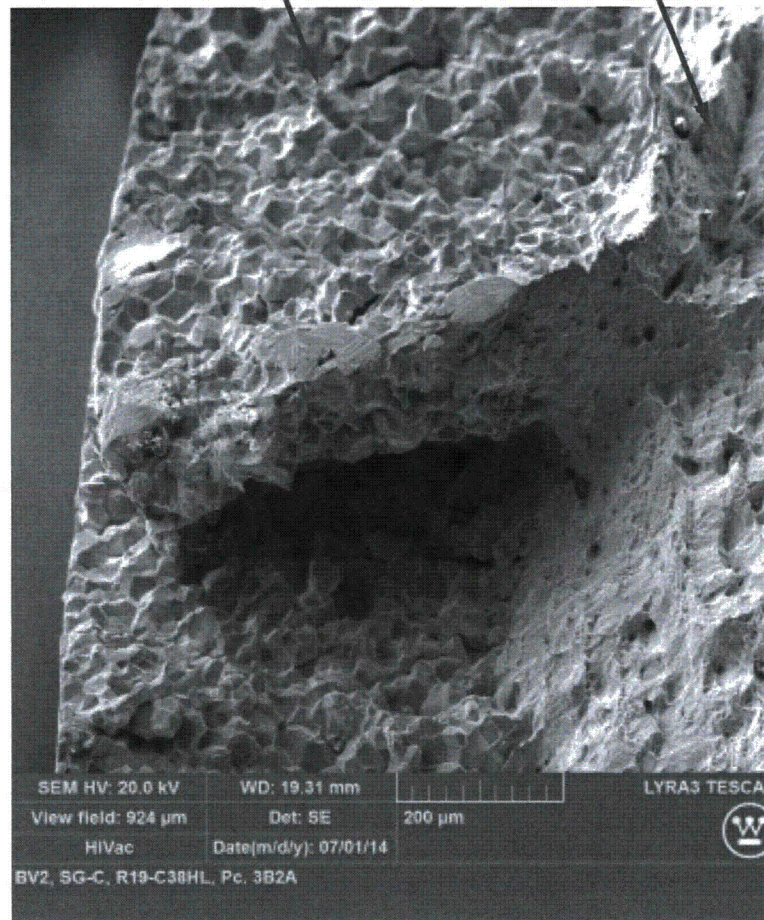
Example of R19C38-3B Burst Opening Fracture Surface (Near Top End of Crack)
